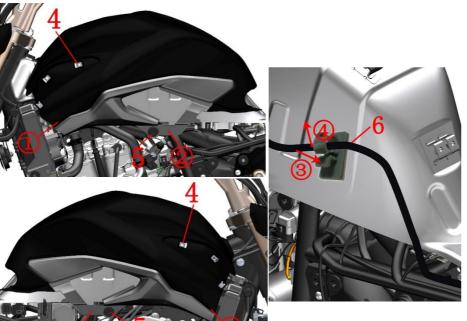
Fuel tank component		Fuel tank assembly component 1	CHK
